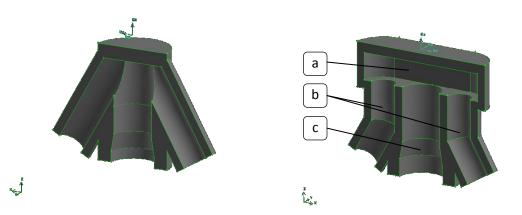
Geometry of the arrowhead and prototype air nozzles: a–gas collector, b-outlet arms, c-inlet
